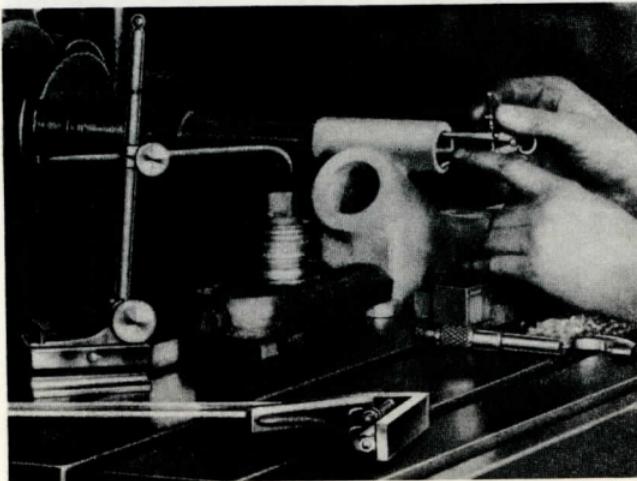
Checking the diameter of a hole after boring. The Micrometer is used to read the size of the caliper setting.
